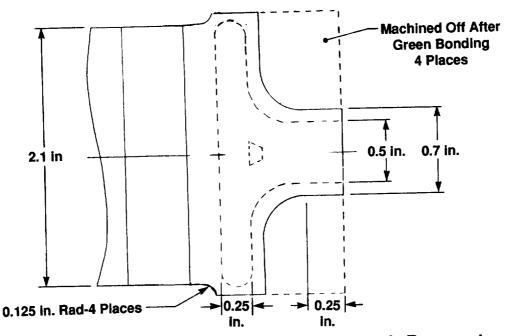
Manifold Design of Side Entry Ceramic Regenerator. Corners and 0.5 in. Inlet are Machined After Green Bonding
